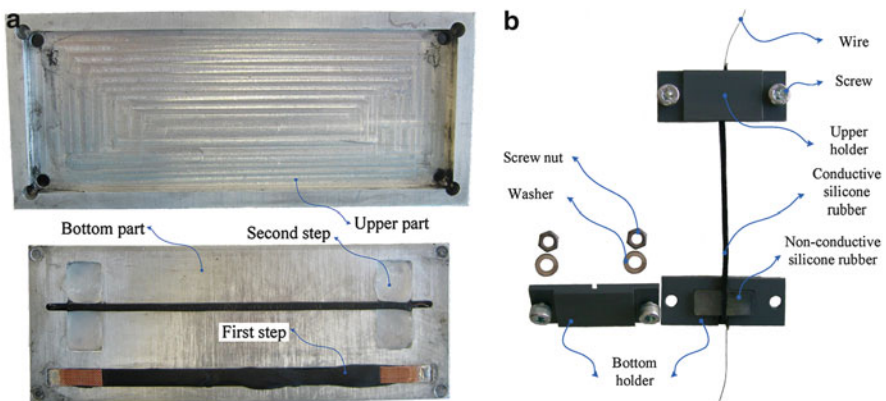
(a) Press tool; (b) Holder (Issa and Zentner 2012)
